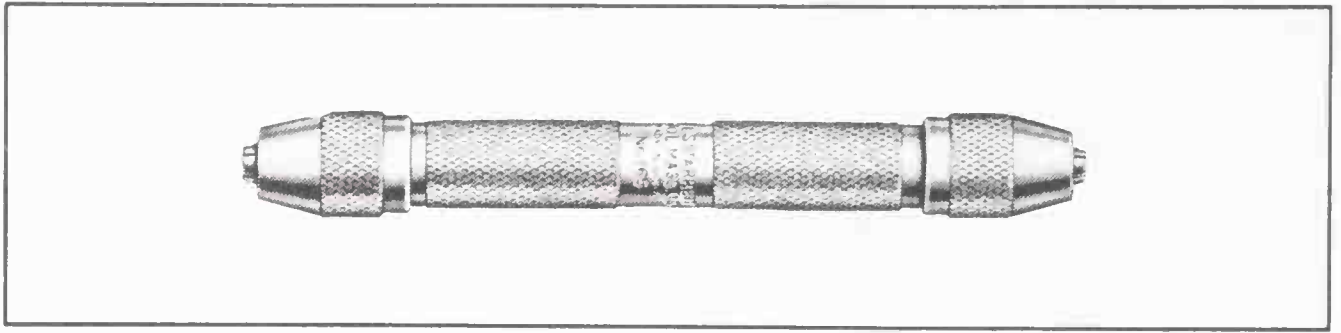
A pin vise is ideal for holding small rods and pin stock for filing, grinding, or polishing.
